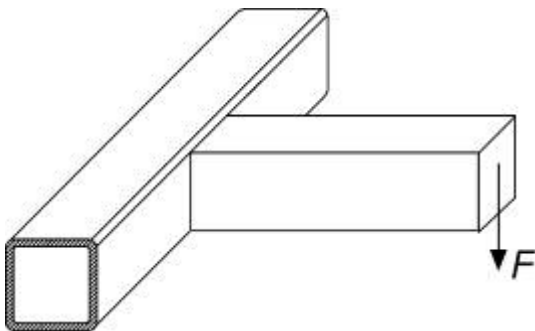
Typical loading of a T joint (Yrjölä 2008).
